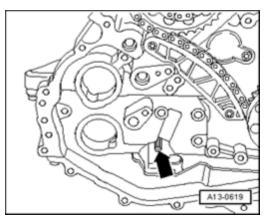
Driving Out Sealing Rings (For A/C Compressor Drive) And (For Power-Steering Pump Drive)
